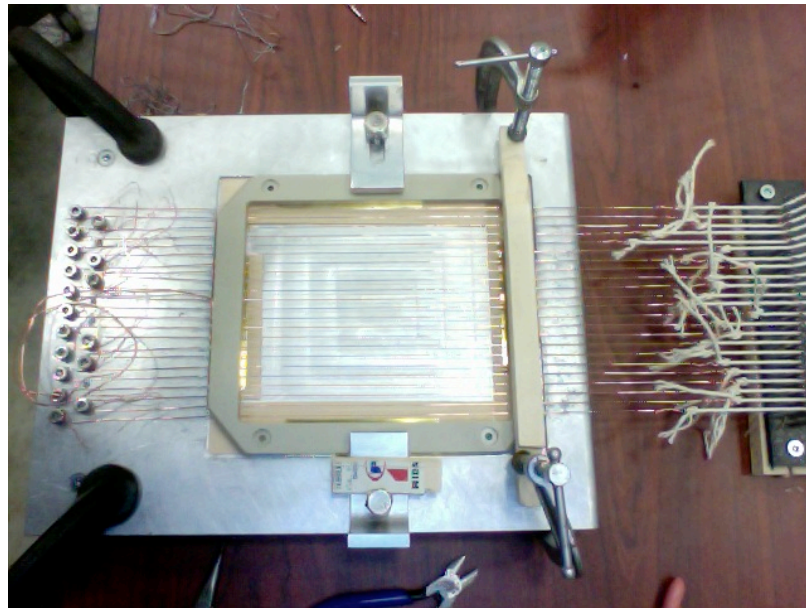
For wiring the frames, an aluminum jig was used to hold the frame in place with two L brackets and a wooden bar used to prevent the frame from lifting out during soldering. On the left hand side are a set of screws used to hold the wires in place during the initial stages of soldering, and the strings on the right hand side of the image go out to the weights used to tensions the wires.
